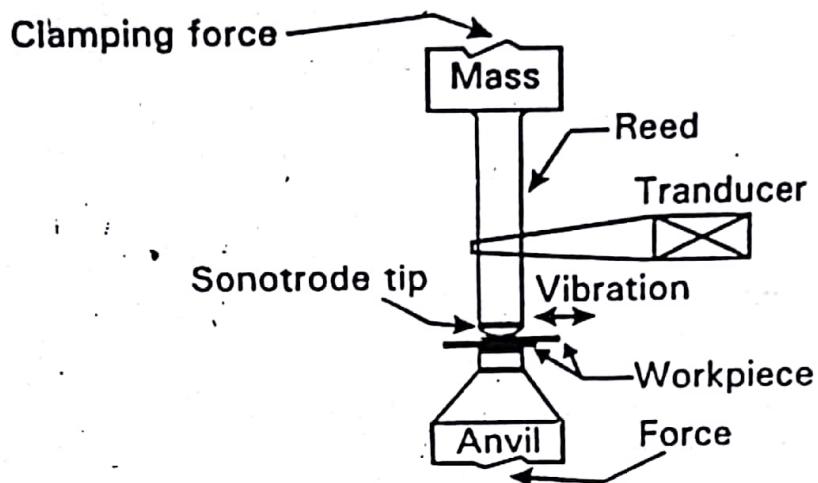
Ultrasonic spot welding system - wedge reed type
